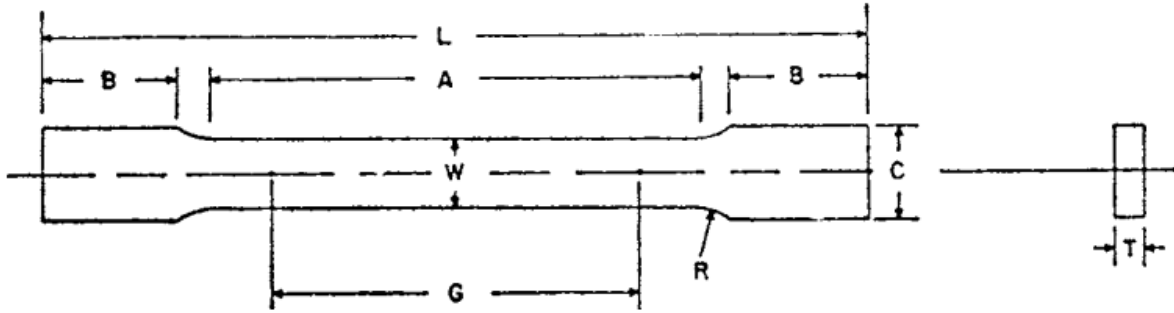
ASTM E8 standard to which dimensions the tensile test specimens were cut (ASTM E8, 2013)
